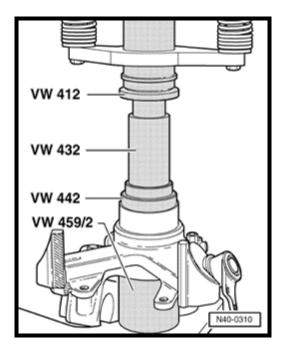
Wheel bearing, pressing out of wheel bearing housing
